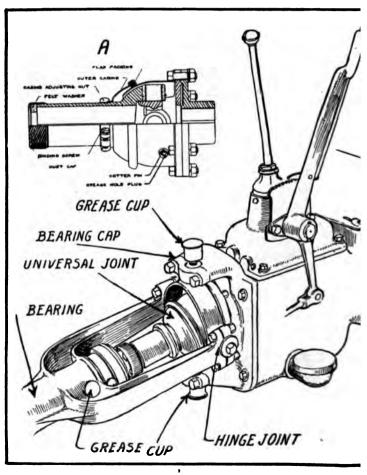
Method of Suspending Torque Tube on 1915 Buic Automobiles.
